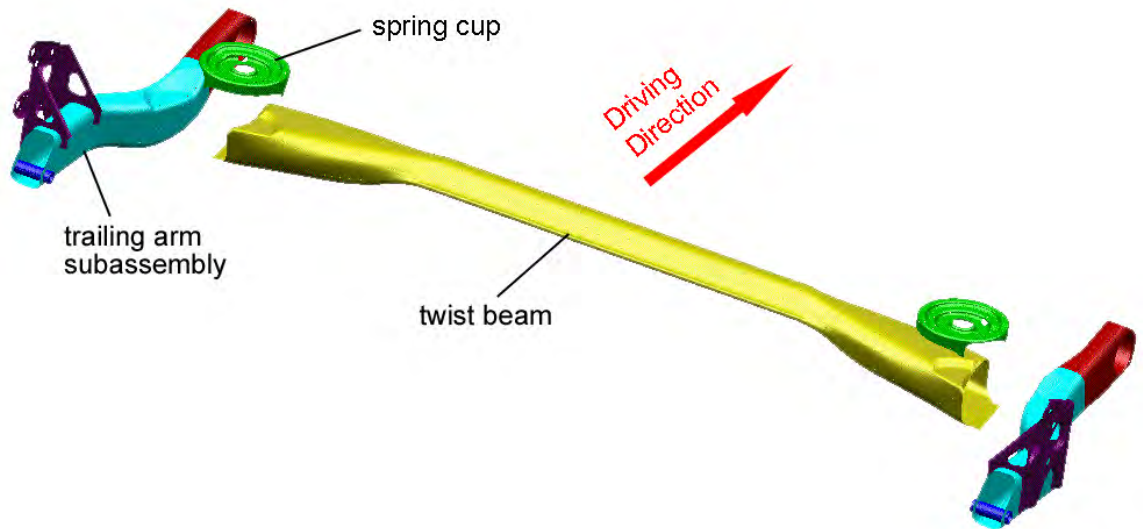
Twist beam rear suspension welding assembly
